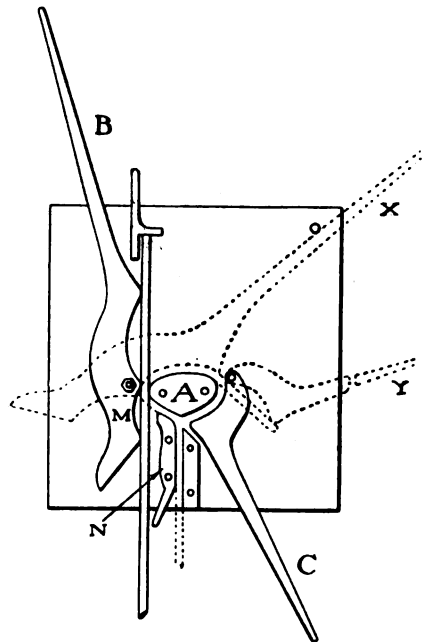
A GOOD, SERVICABLE EYE-BENDING DEVICE.
